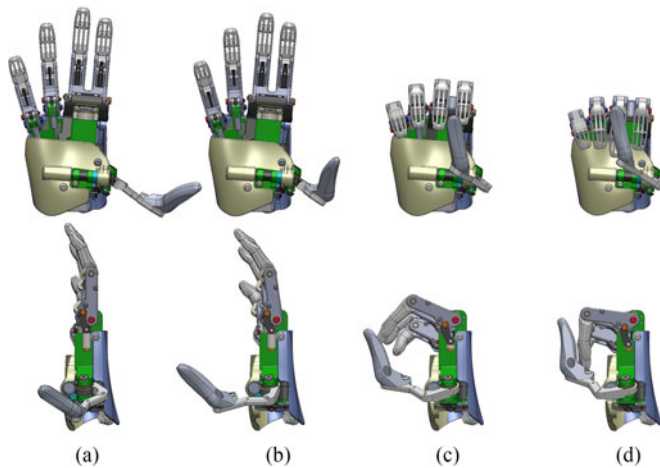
Front and side views of the grasp patterns achieved using a single motor to drive the fingers, and a single motor to drive the thumb at an oblique axis. (a) Palm flat. (b) Open grasp. (c) Chuck grasp. (d) Cylindrical grasp.
